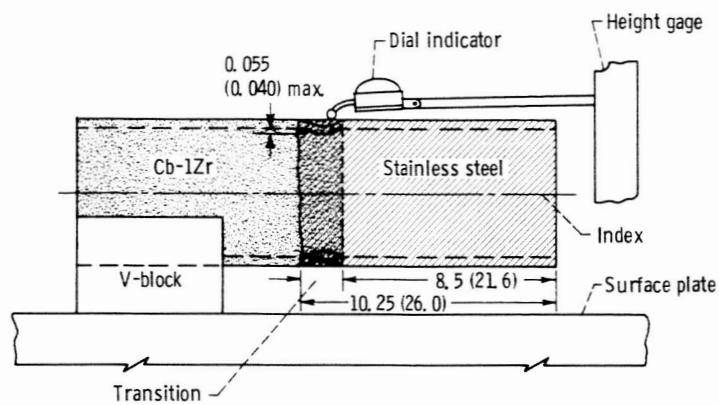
Setup for dimensional inspection of Cb-1Zr - stainless-steel bimetal joint.
